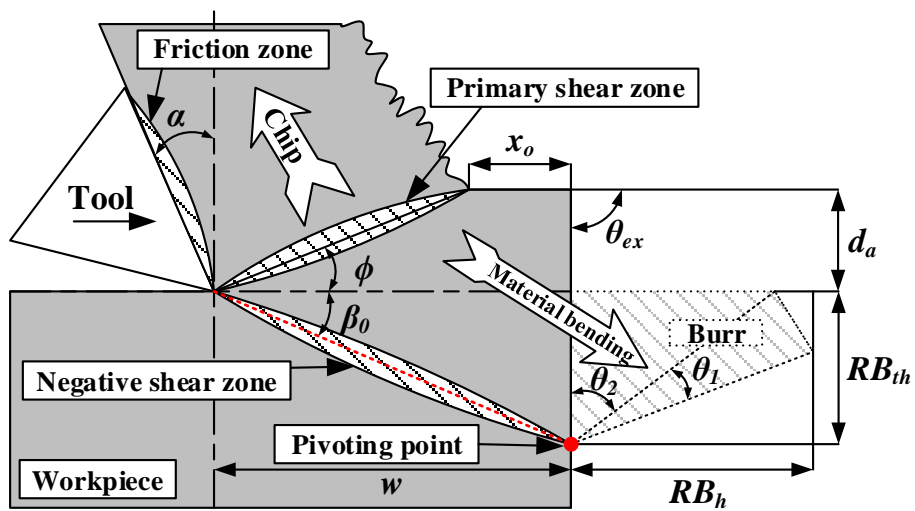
Rollover burr that occurs when cutting tool exits workpiece⁹⁾.
